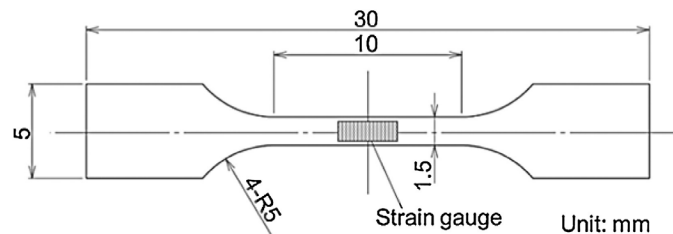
Geometry of specimen and mounting position of strain gauges for pure bending test
